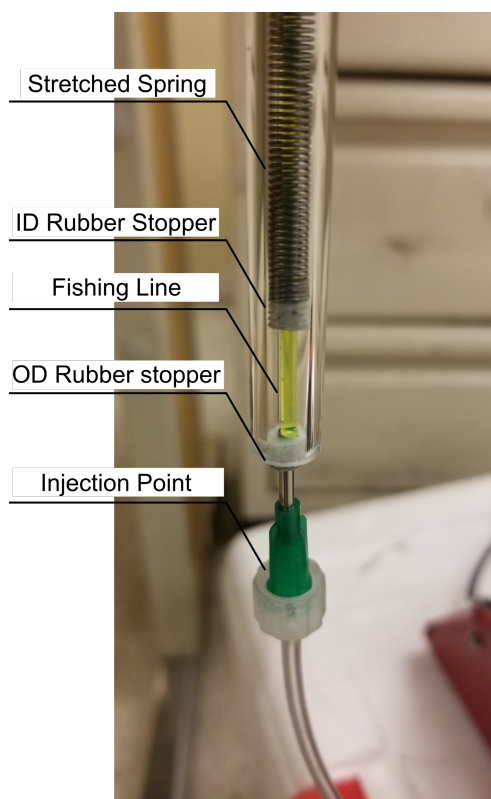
Picture of the tube casting prior to injection of the silicone composite.
